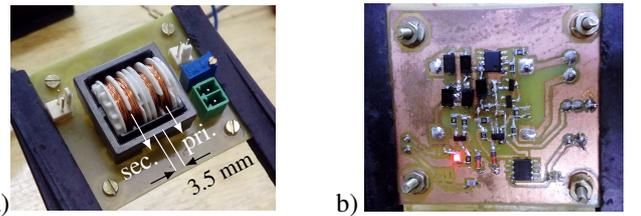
APS power cell prototype: a) top view and b) bottom view. Input to output capacitance is 5.58 pF measured at 1 kHz. The board dimensions are 50 mm x 61 mm and the displacement between primary and secondary windings is 3.5 mm.
